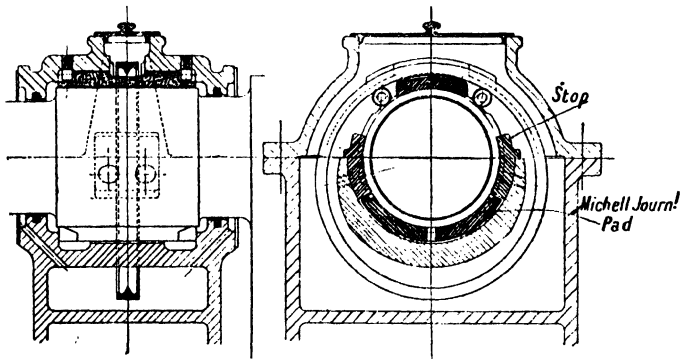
Michell Journal Bearing for Marine Oil Engine.
